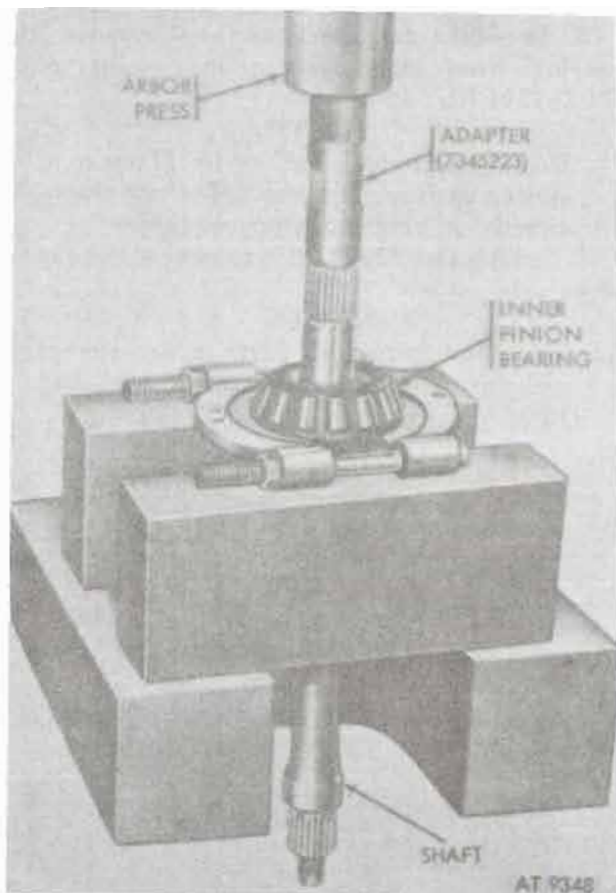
Removing inner front pinion bearing from pinion shaft.
